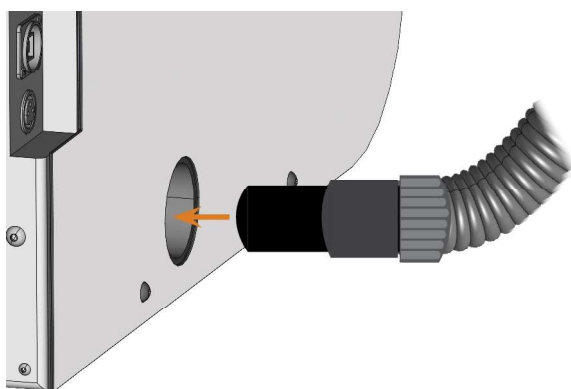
INSERTING THE SUCTION HOSE INTO THE MACHINE
